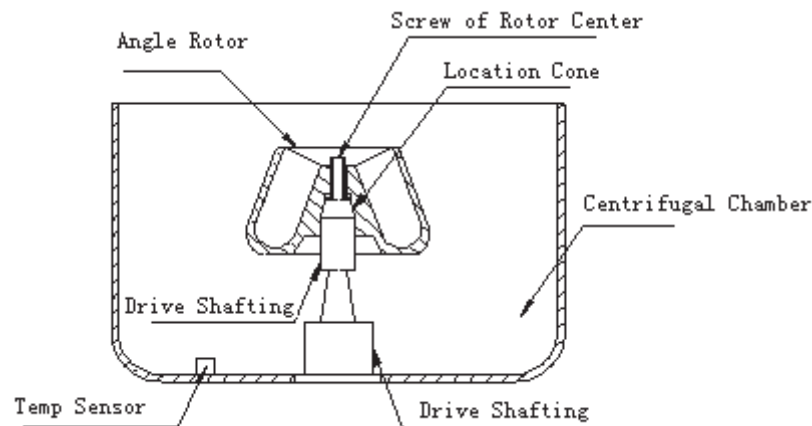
Rotor installation and disassembly on external cone shaft
